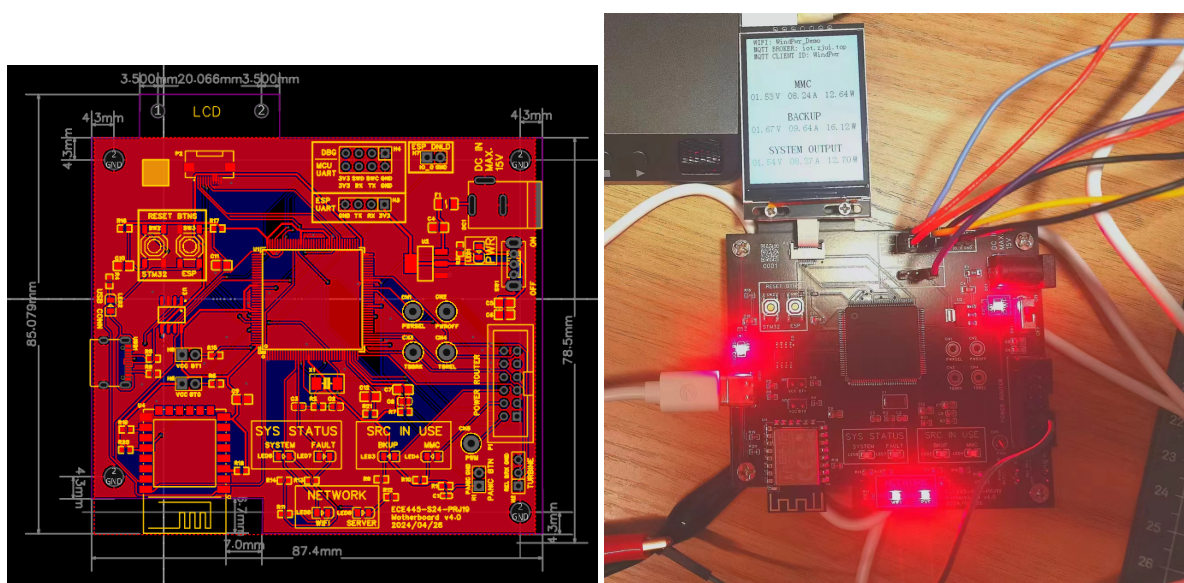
Left: The PCB design schematic of motherboard. Right: The photo of the motherboard PCB.
